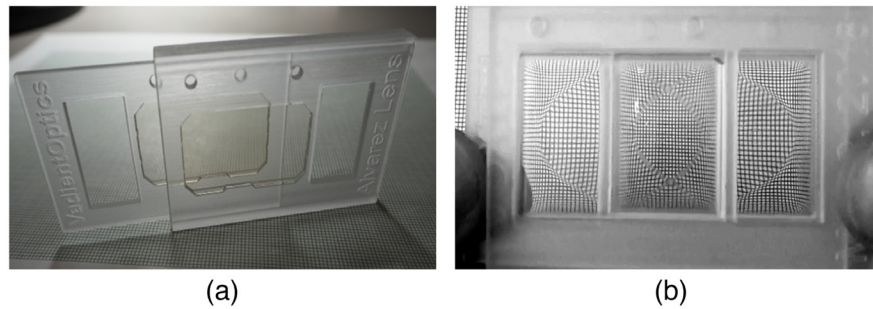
Pictures showing two different views of the printed Alvarez-Lohmann lenses, including (a) printed mechanical mounts and guides, and (b) mounts with integrated lens elements.
